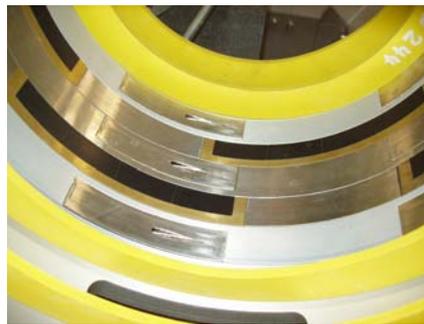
6 probes; 4 blocks per probes, 32 elements per block
